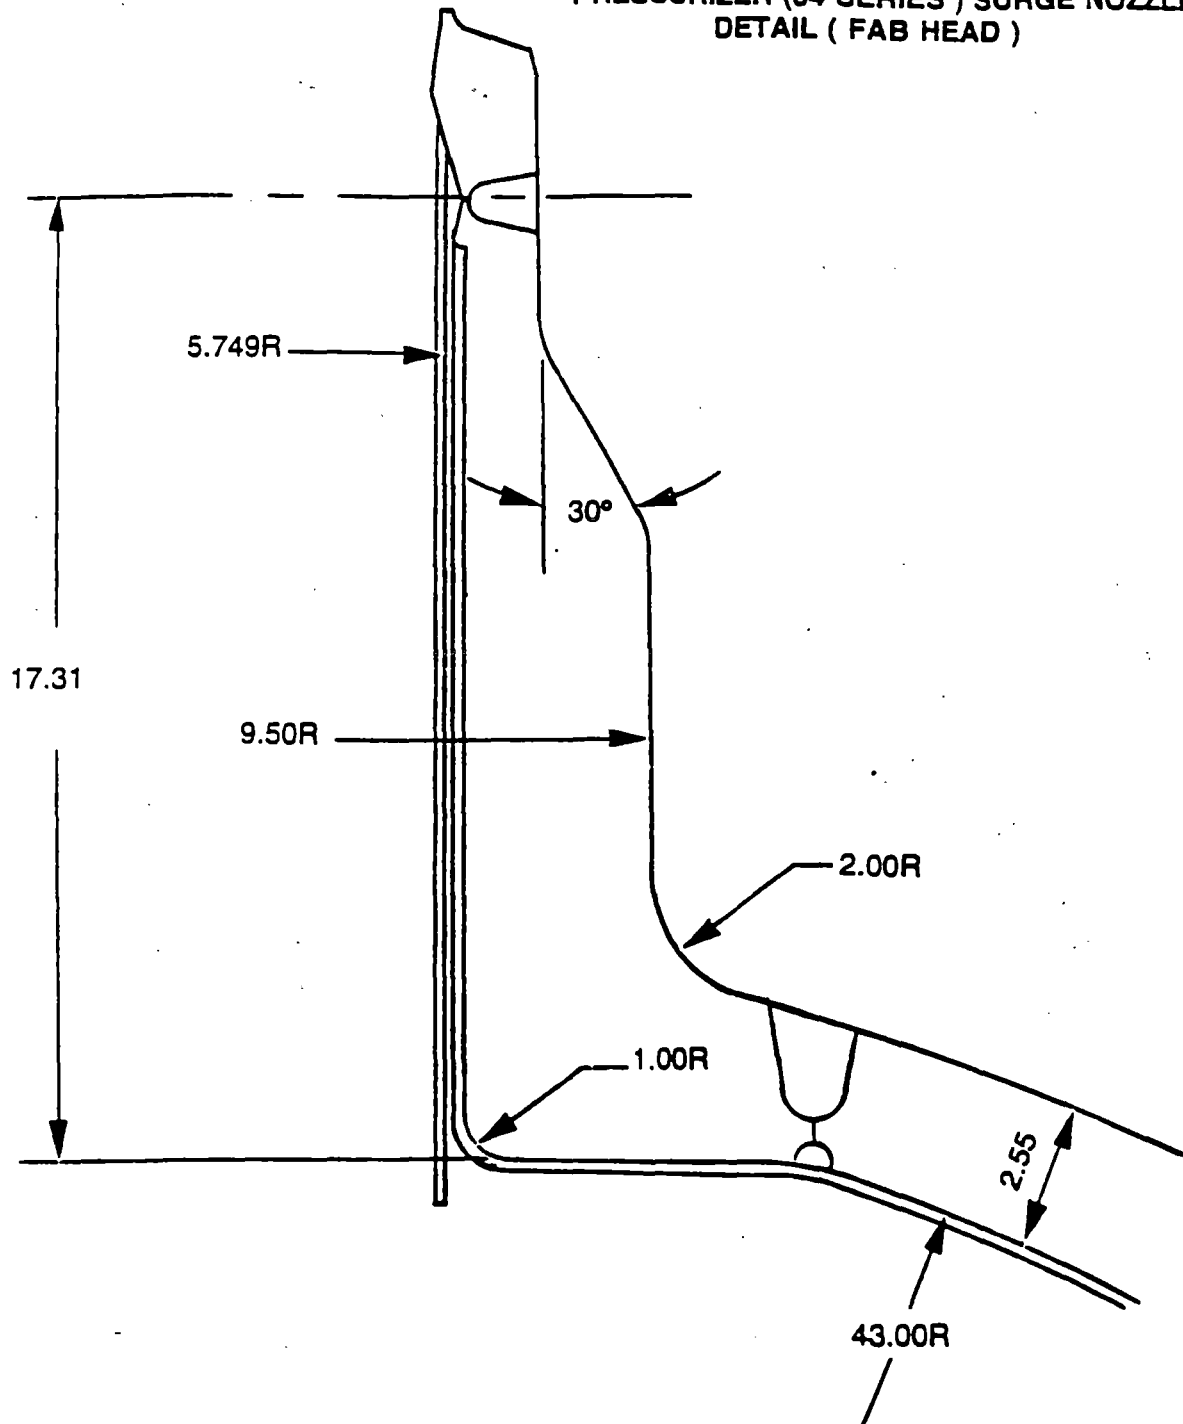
Geometry of a Typical Pressurizer Surge Nozzle - Fabricated Head Design
